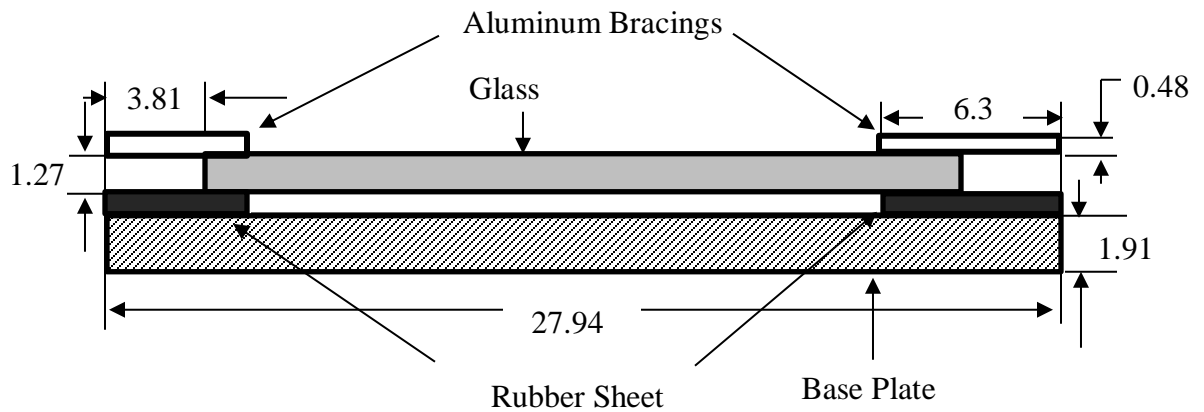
Cross section of assembled Hele-Shaw cell with relevant dimensions (cm)
